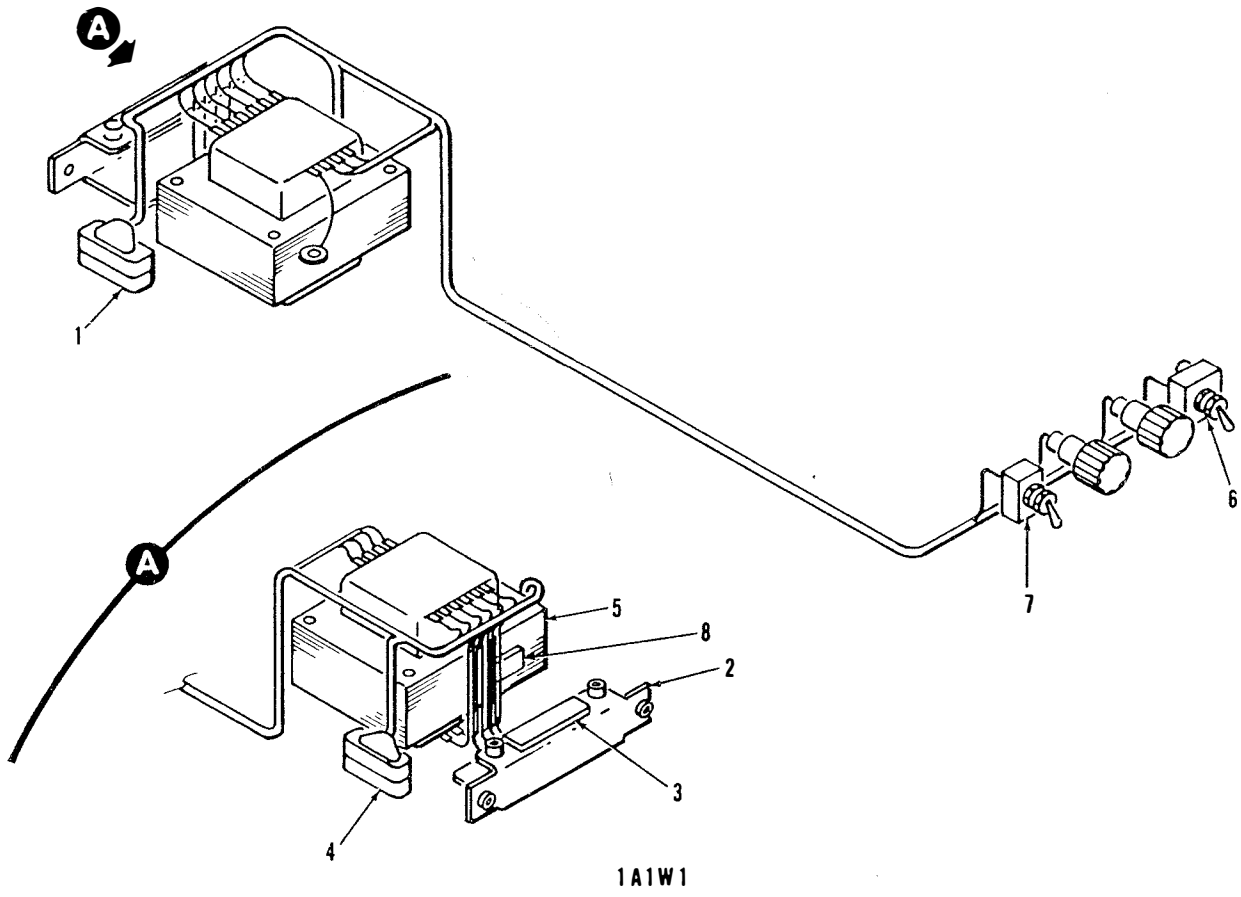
Converter Cable Assemblies (Sheet 1 of 2)
